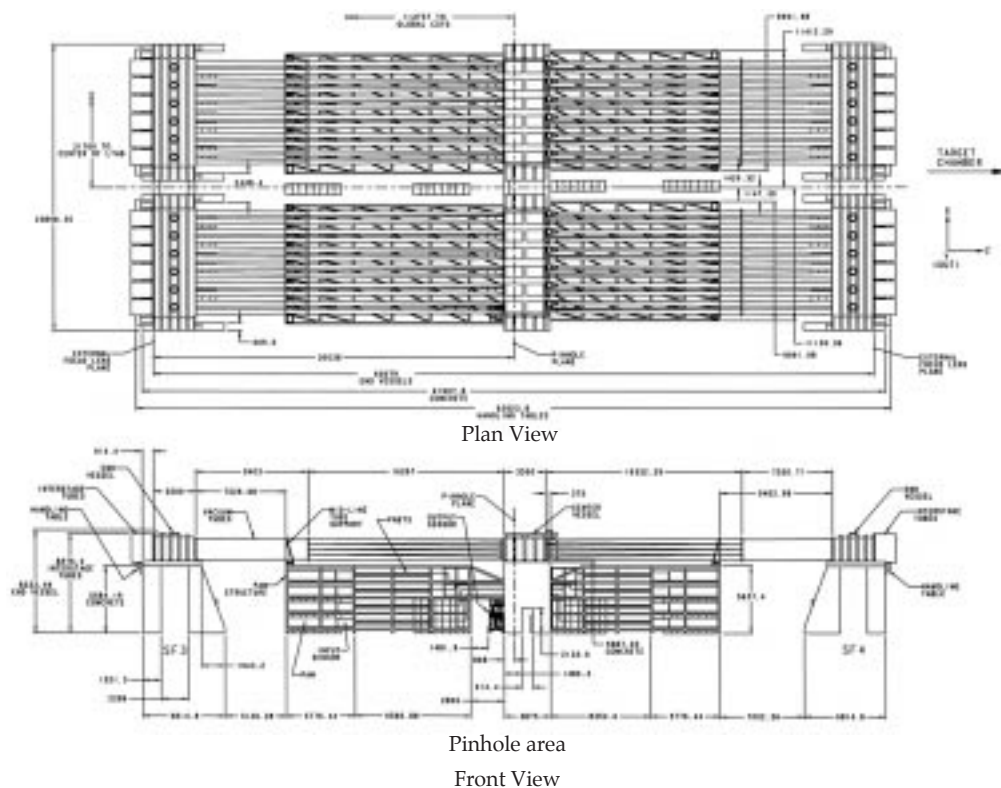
Plan and elevation of the TSF support structure. All distances are in millimeters. (40-00-1097-2296pb01)
